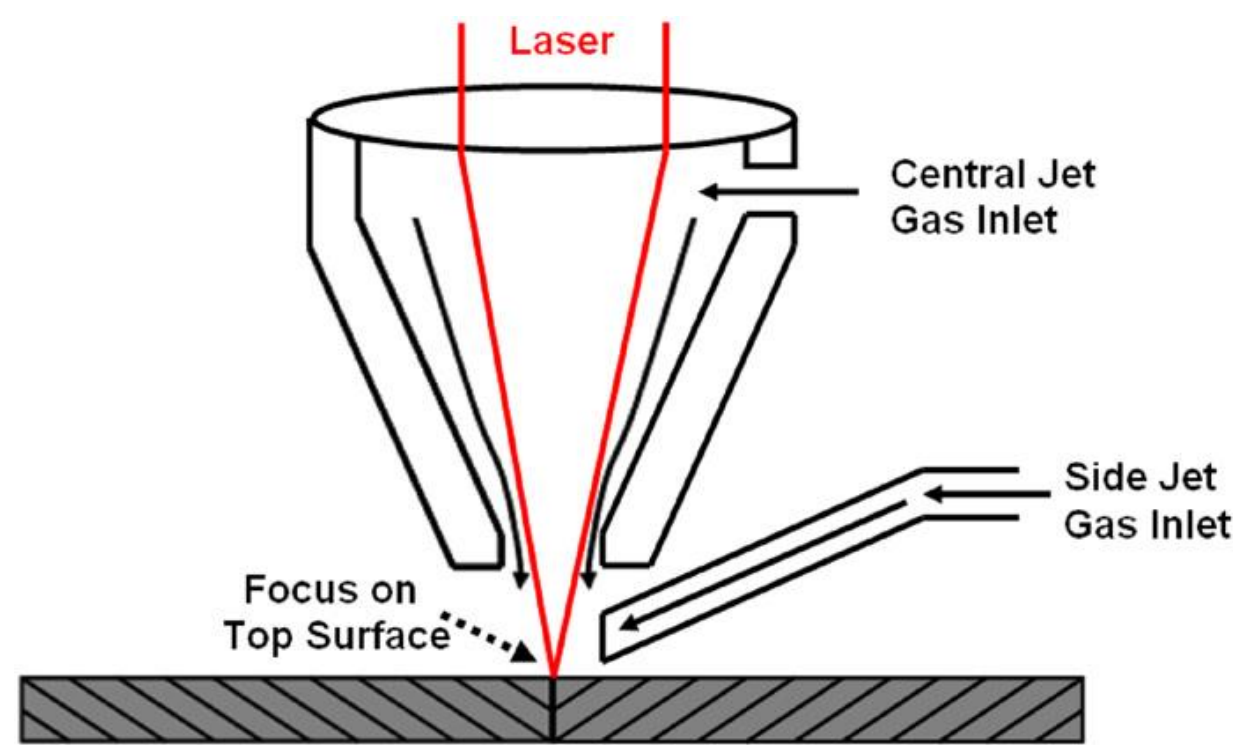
Experimental setup for the fiber laser welding [1]
